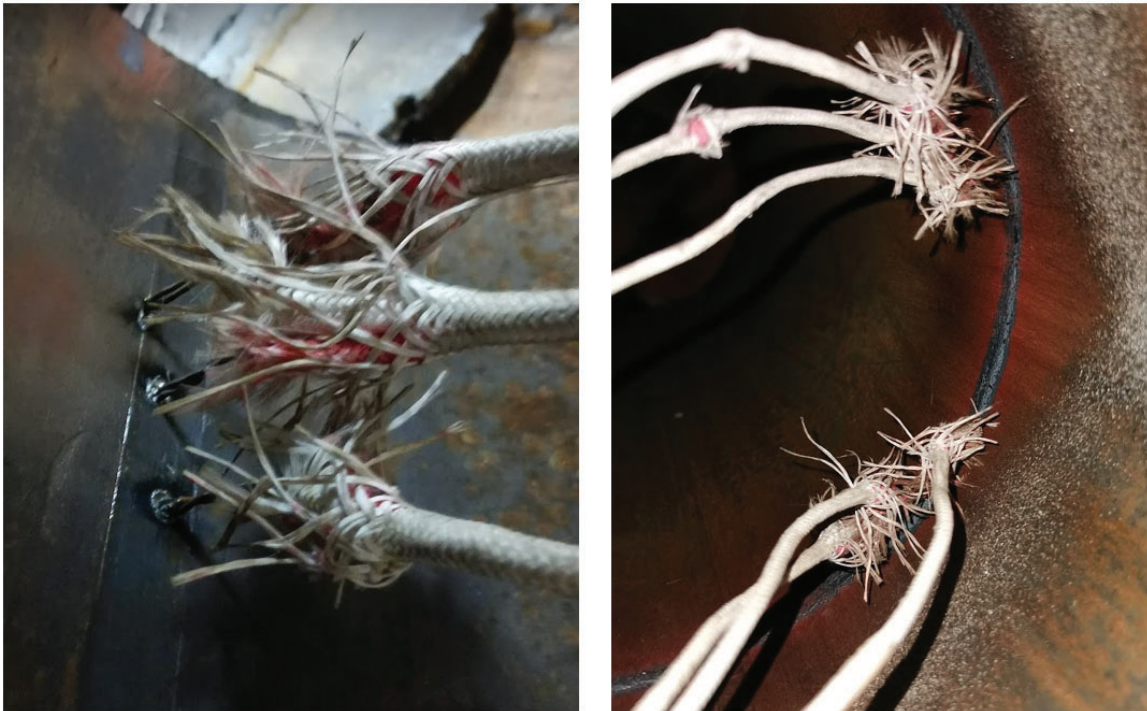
Thermocouple placement to measure inside surface temperature of in-service sleeve weld. Left figure shows three thermocouples longitudinally spaced to capture maximum temperature of root pass and second pass against carrier pipe. Right figure shows two sets of thermocouples for redundancy in measurements.
